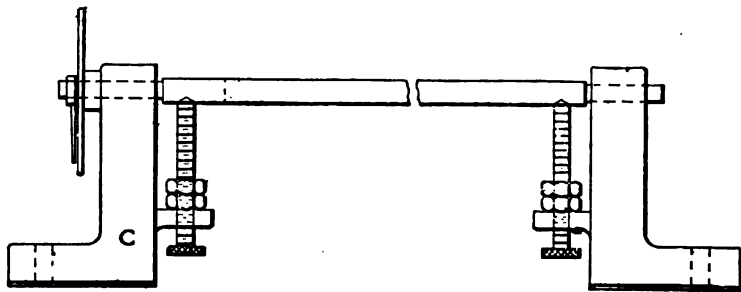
Grinding Fixture for Paper-cutting Knives.
